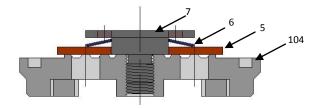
; Cross-sectional bottom valve assembly for axle damper
